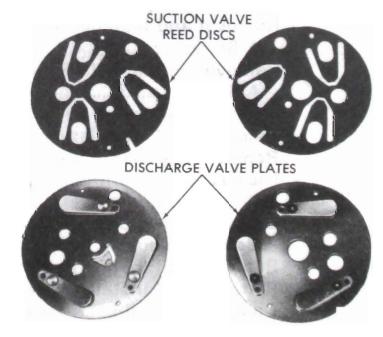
B-1 Compressor Suction Valve Reed Discs and Discharge Valve Plates
